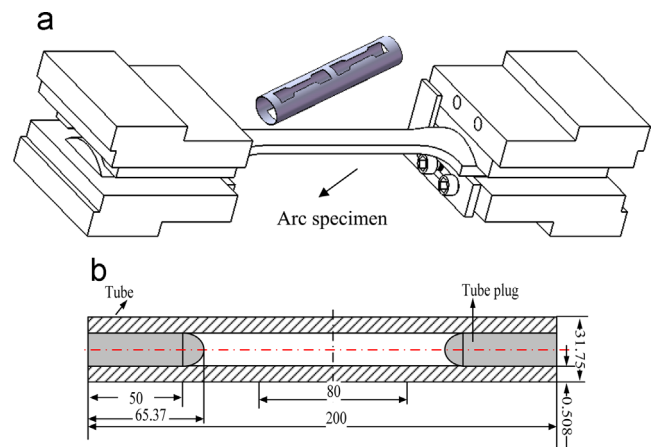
Specimen design of HSST for uniaxial tensile test (a) clamp die for curved specimen; and (b) tubular specimen.
